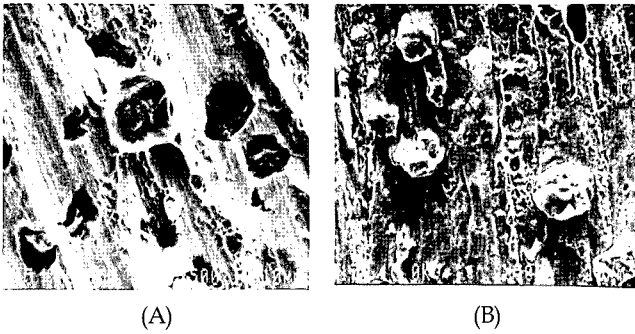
SEM image of tensile fractured surface of welded joint (Thickness of insert metal : 2mm), (A) GCD 45 side, (B) A2024 side
